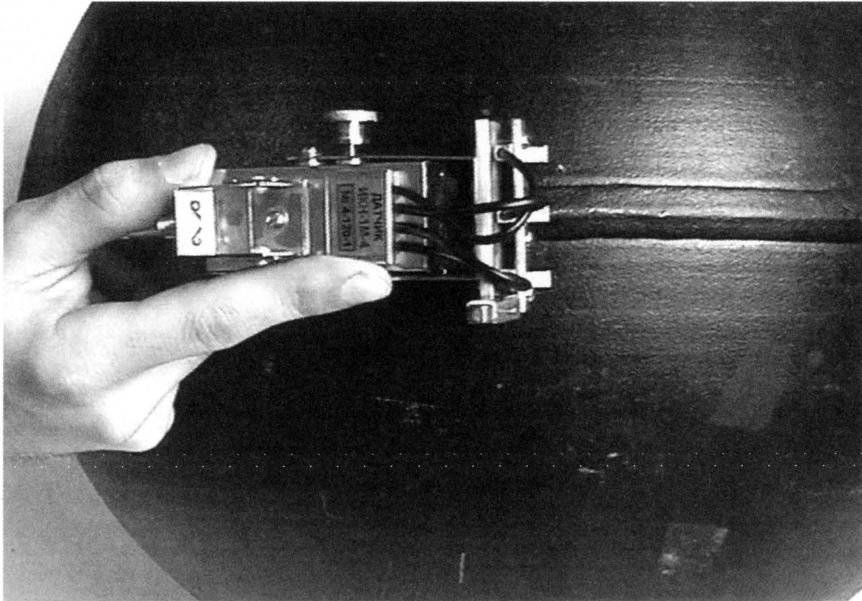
Welded container tested by 1 type sensor.
